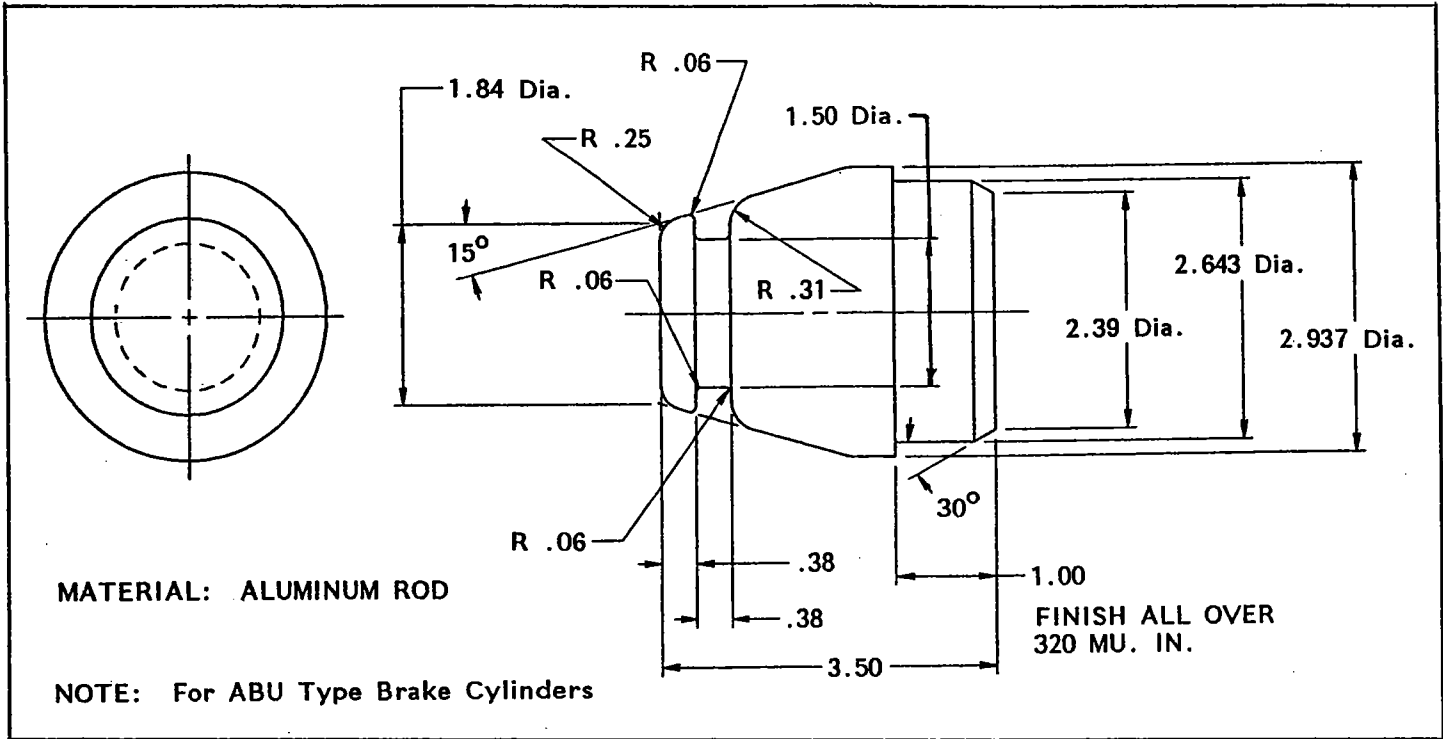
NON-PRESSURE HEAD ASSEMBLY TOOL
